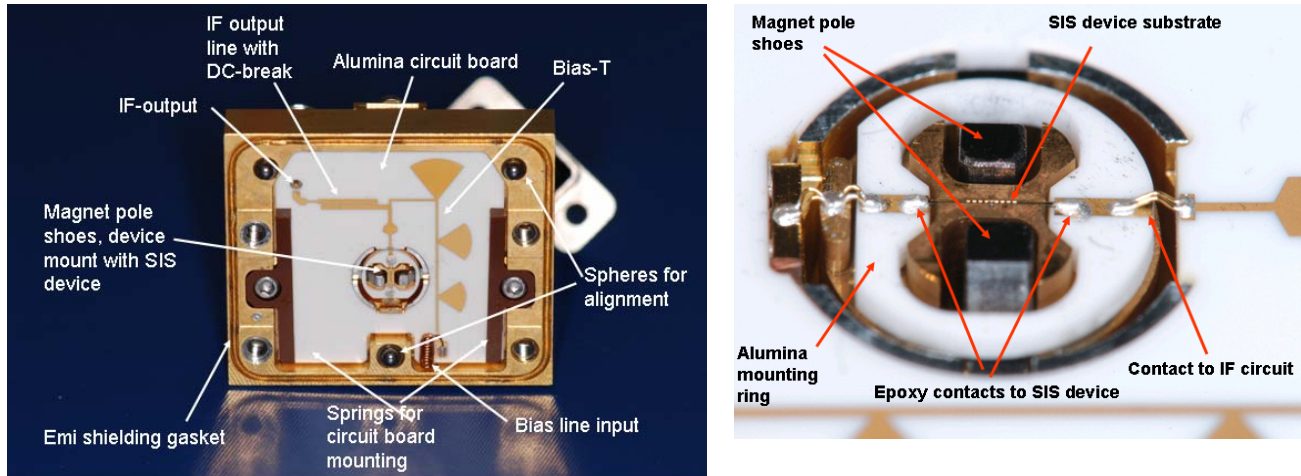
Details of the 'IF-box' of the mixer unit (left) and the device mounting and contacting (right)
